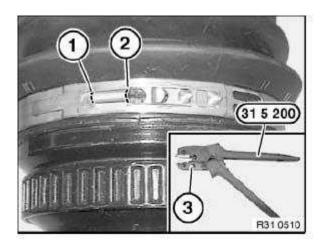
Identifying Special Tool (31 5 200) Courtesy of BMW OF NORTH AMERICA, INC.
